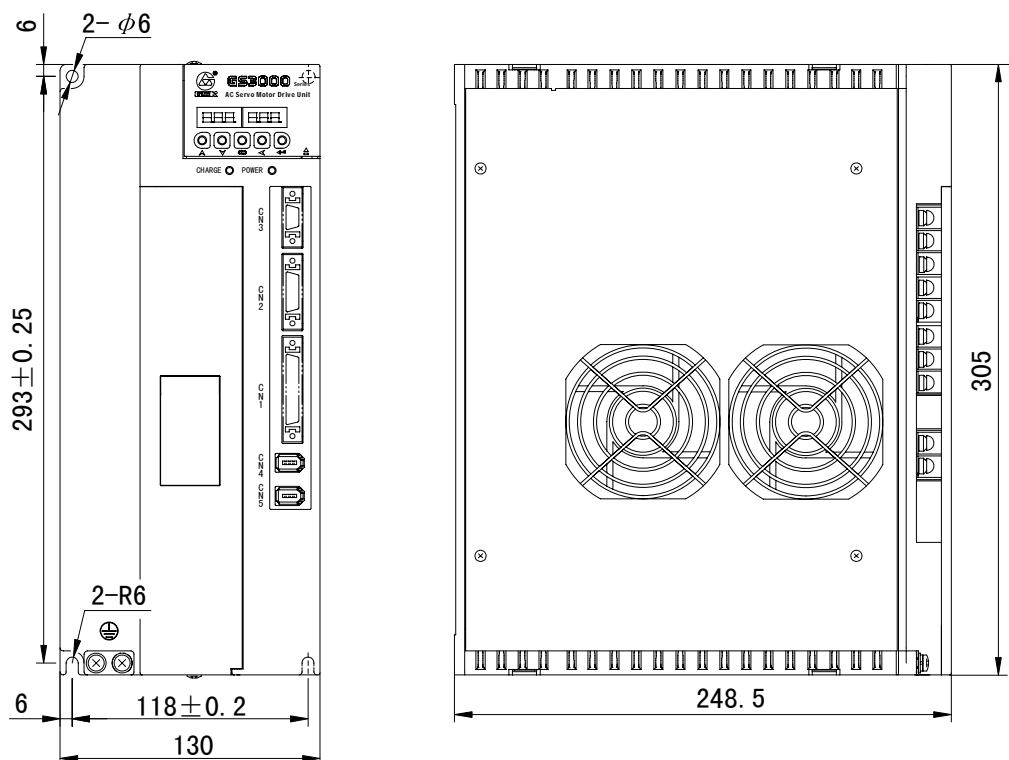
GS3075, GS4075 Series installation dimension (Unit: mm)
